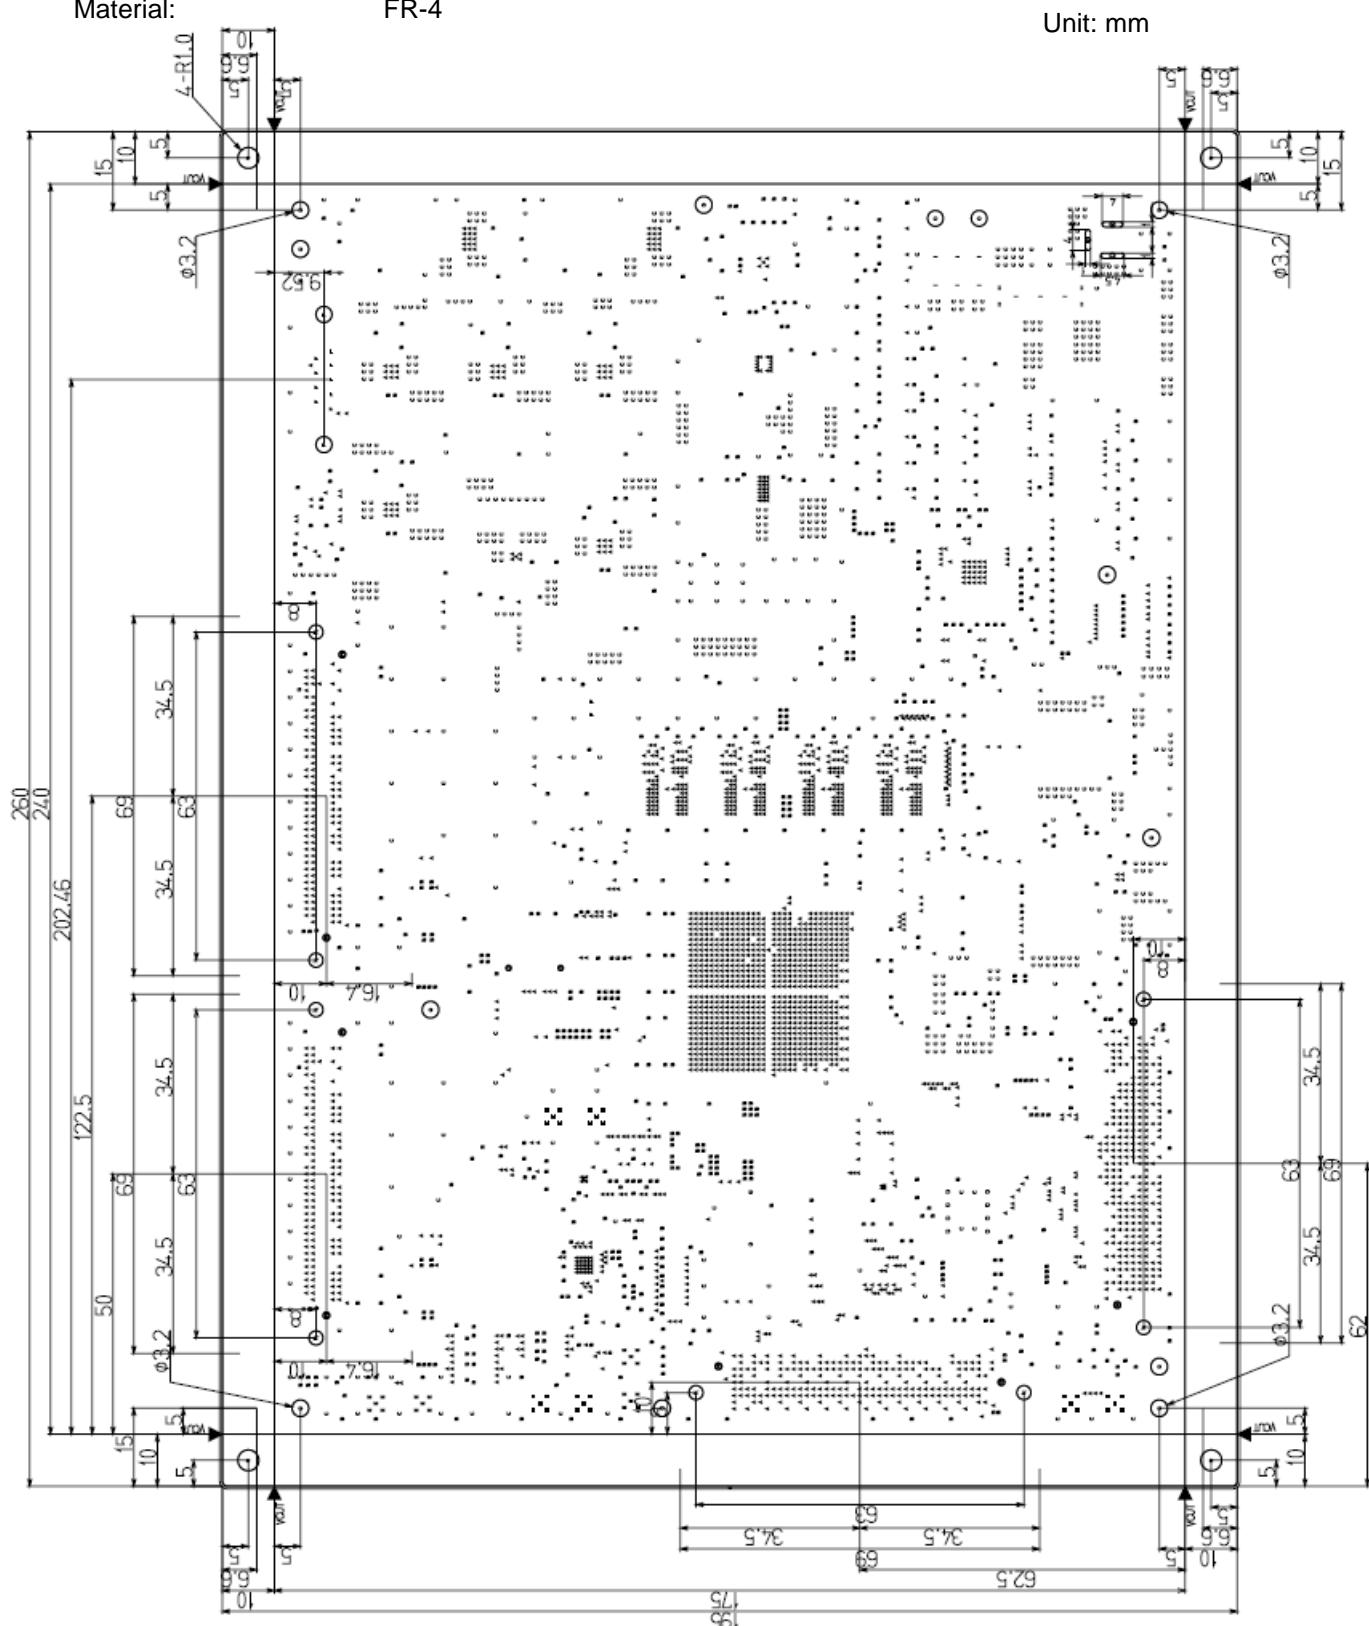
Board Dimensions (inclusive of wastable substrate)
